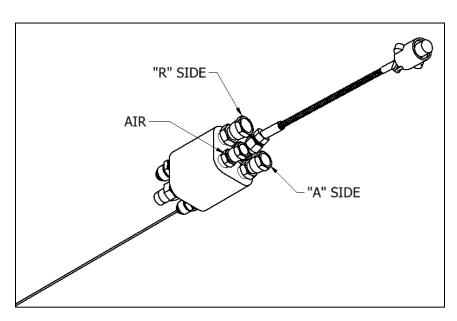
Temperature Sensing Unit Assembly (TSU Assembly) Part # EL-51A-4 Replacement Sensor Part # EL-51A-2
